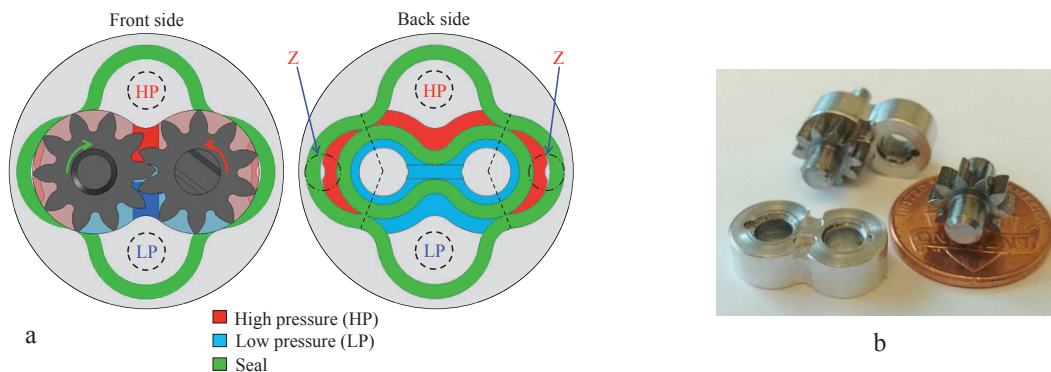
Design and balance areas of the bushing (a), bushings and gears of the real pump (b)
